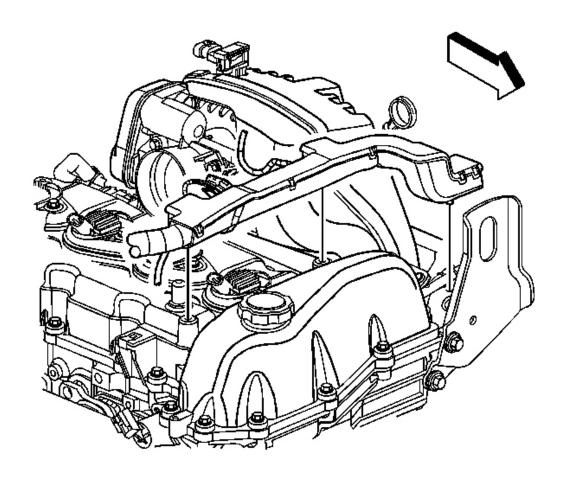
View Of Engine Wiring Harness Conduit Courtesy of GENERAL MOTORS CORP.
